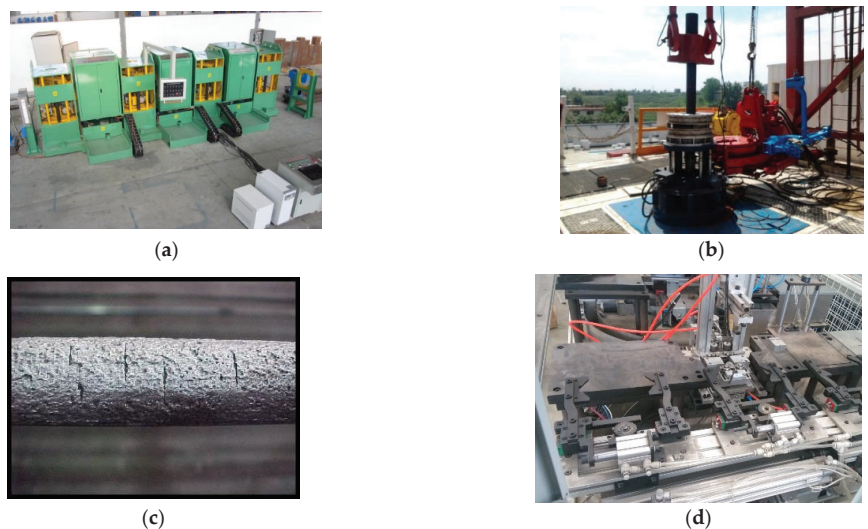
Applications of MFL: (a) seamless steel pipe; (b) drill pipe; (c) sucker rod; (d) bearing.
